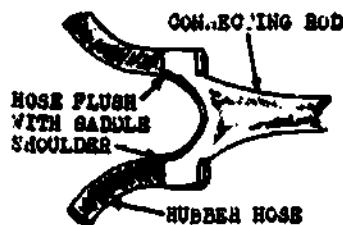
Rubber hose installed on connecting rods to protect crankpin.
